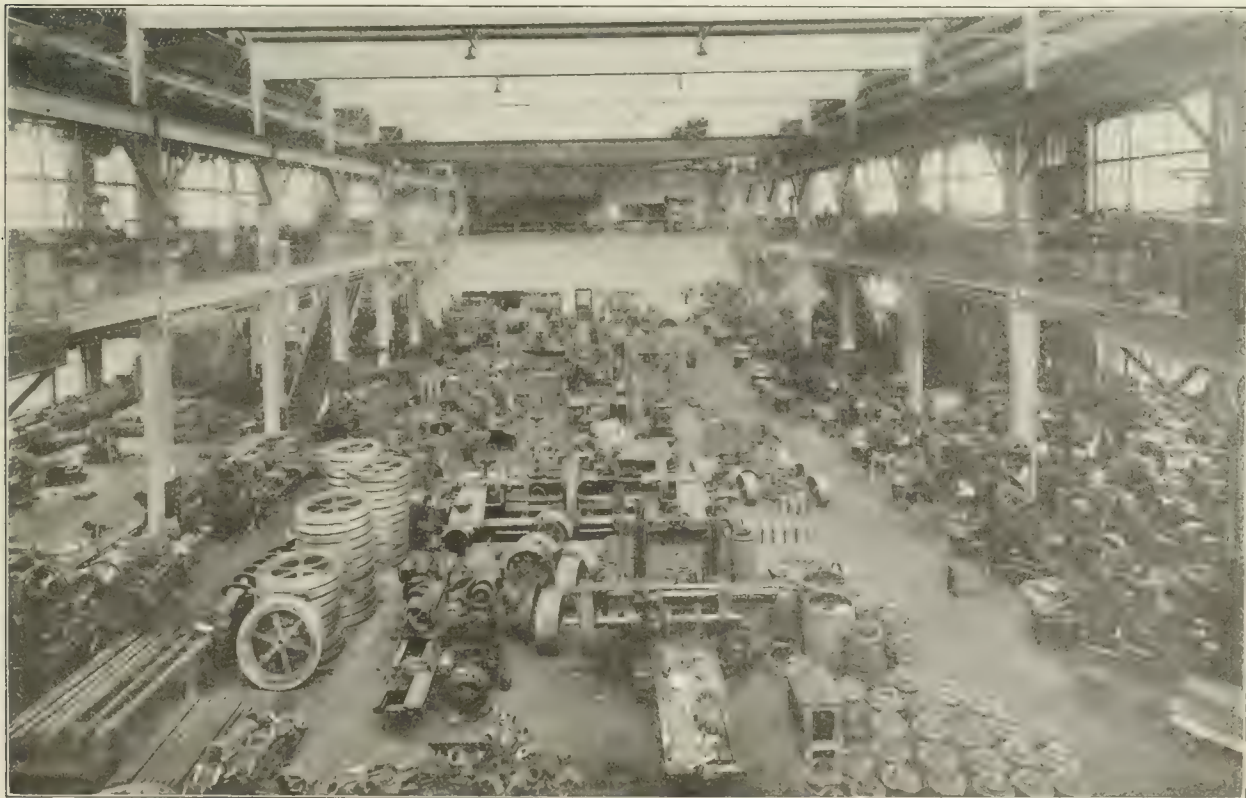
View of Machine Shop Main Floor, Looking Toward Heavy Tool Section at Which End the Work Enters the Shop.
